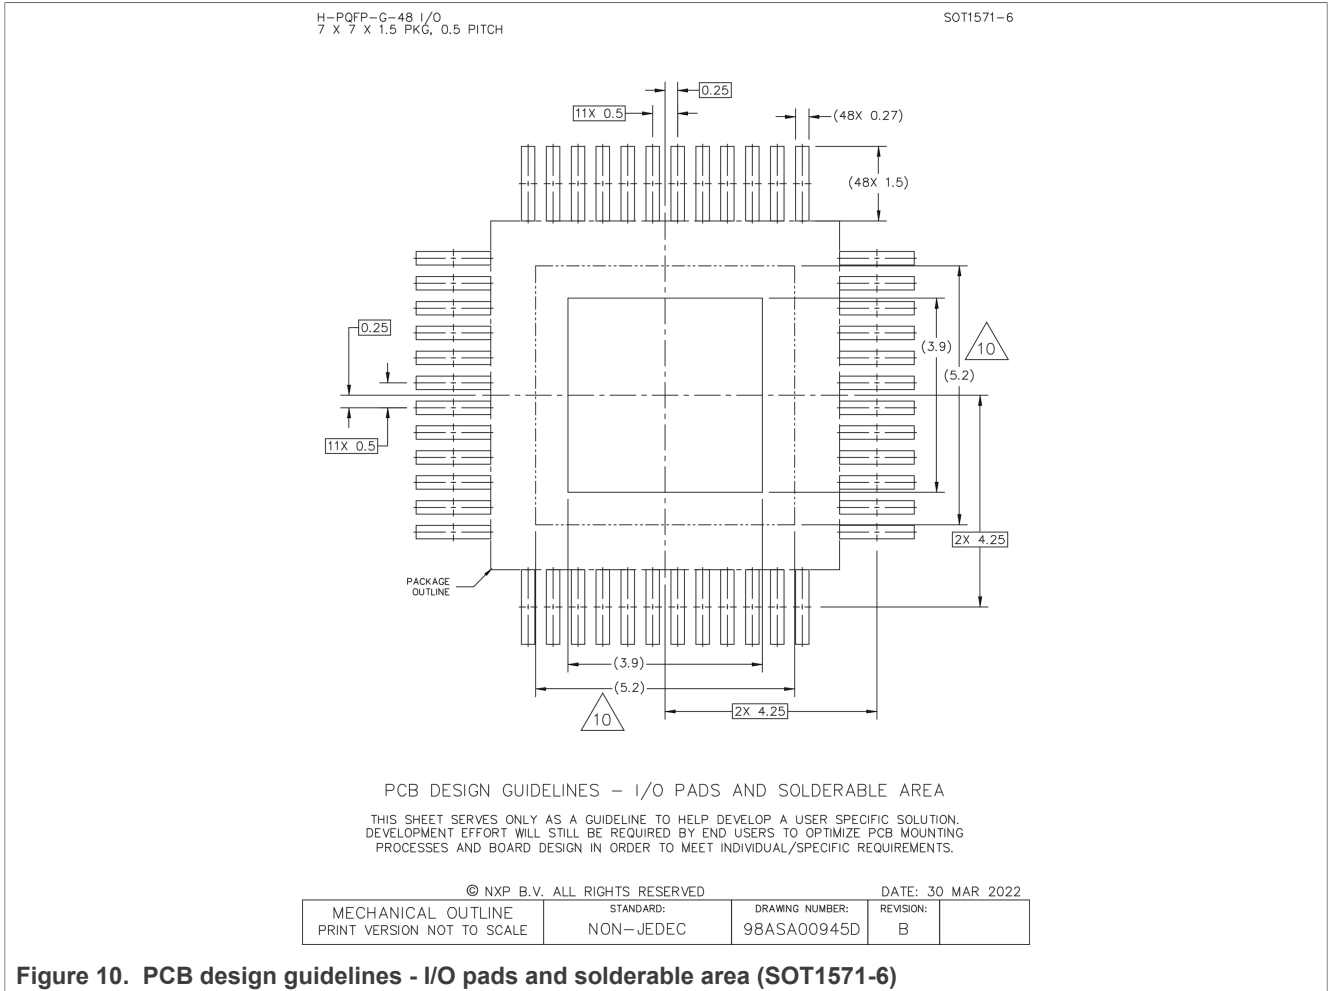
PCB design guidelines - I/O pads and solderable area (SOT1571-6)
